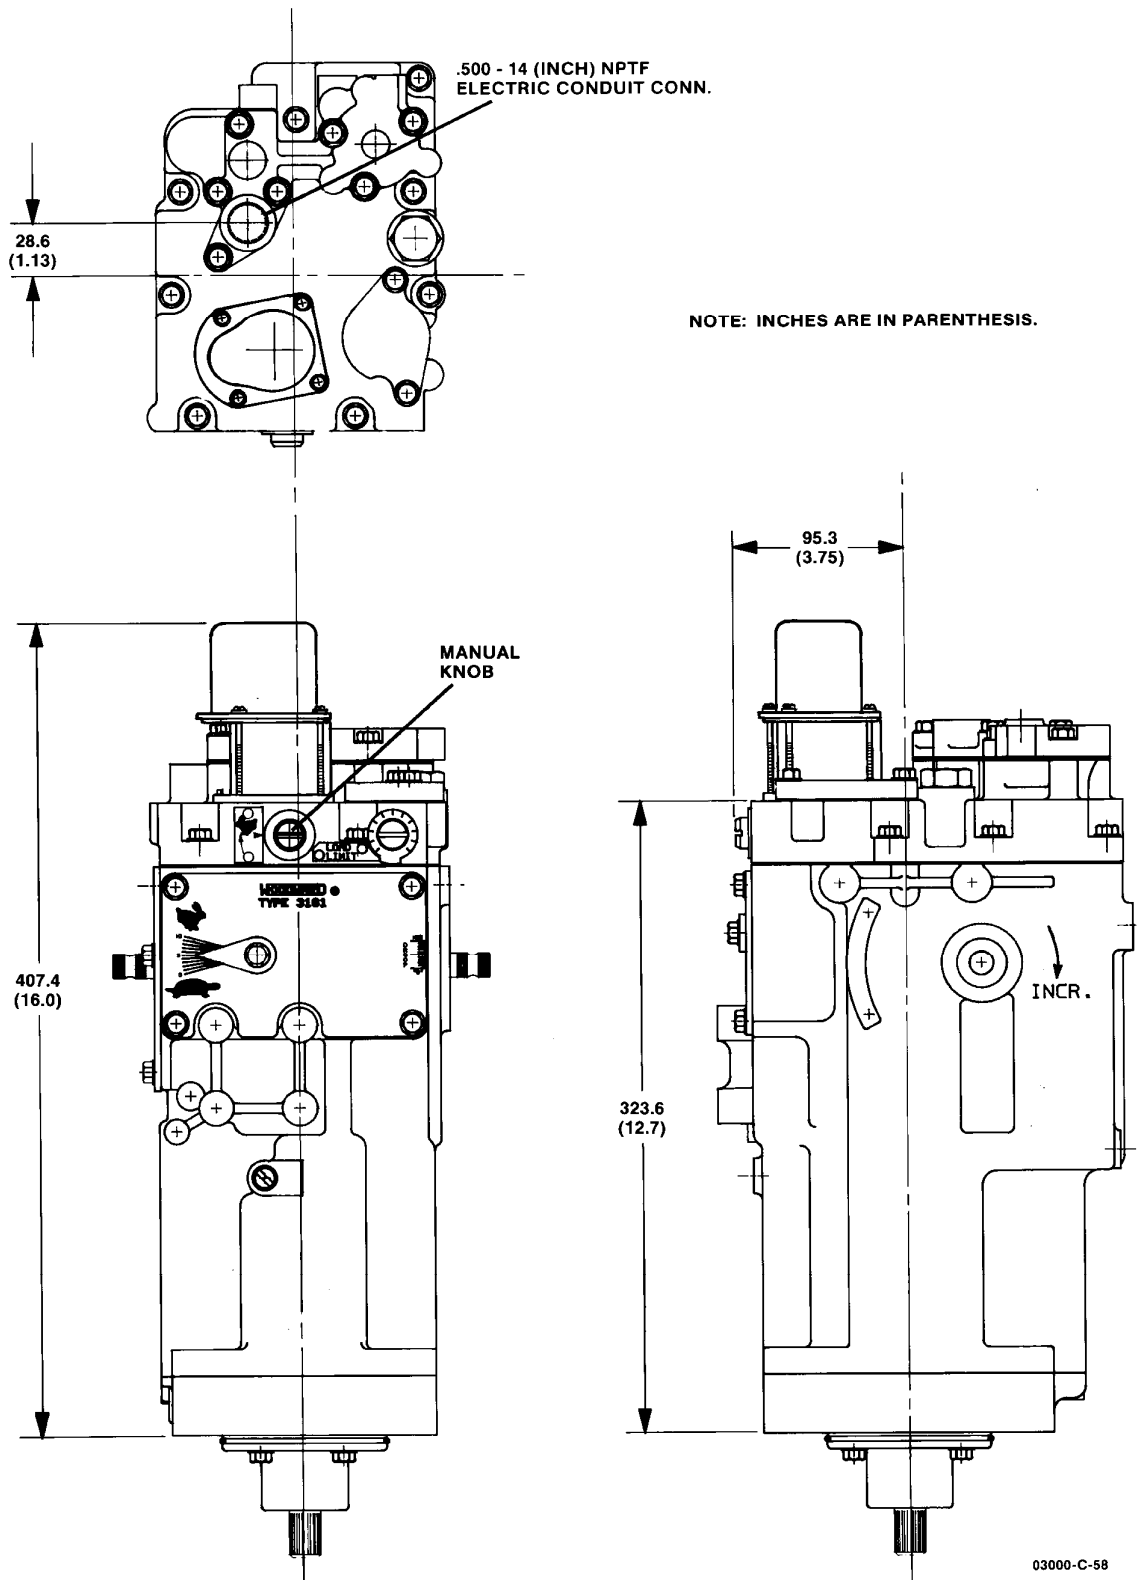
Outline Drawing of 3161 Governor with Motor Speed Setting
